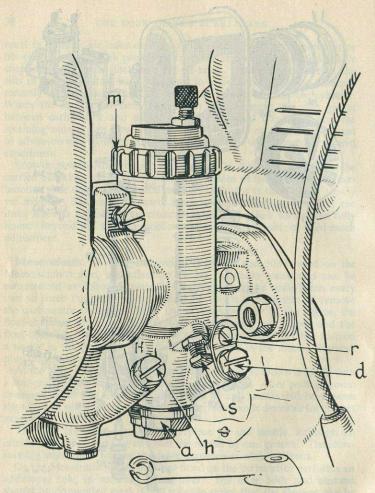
BING CARBURETTOR: MESSERSCHMITT
